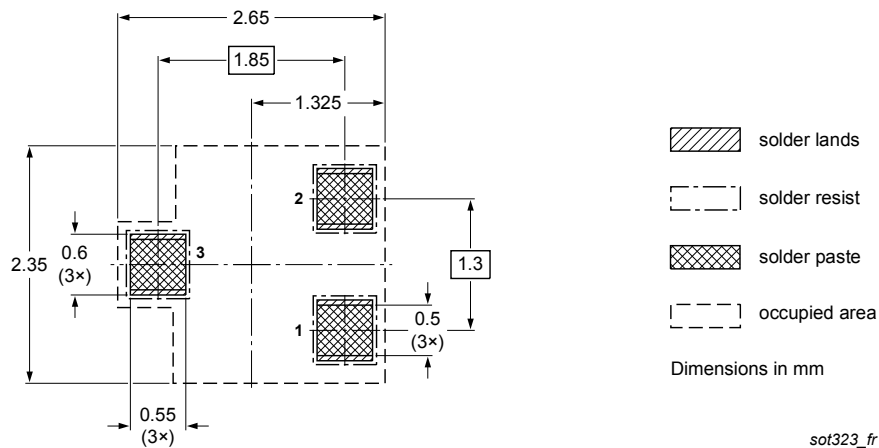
Reflow soldering footprint for SC-70 (SOT323)
